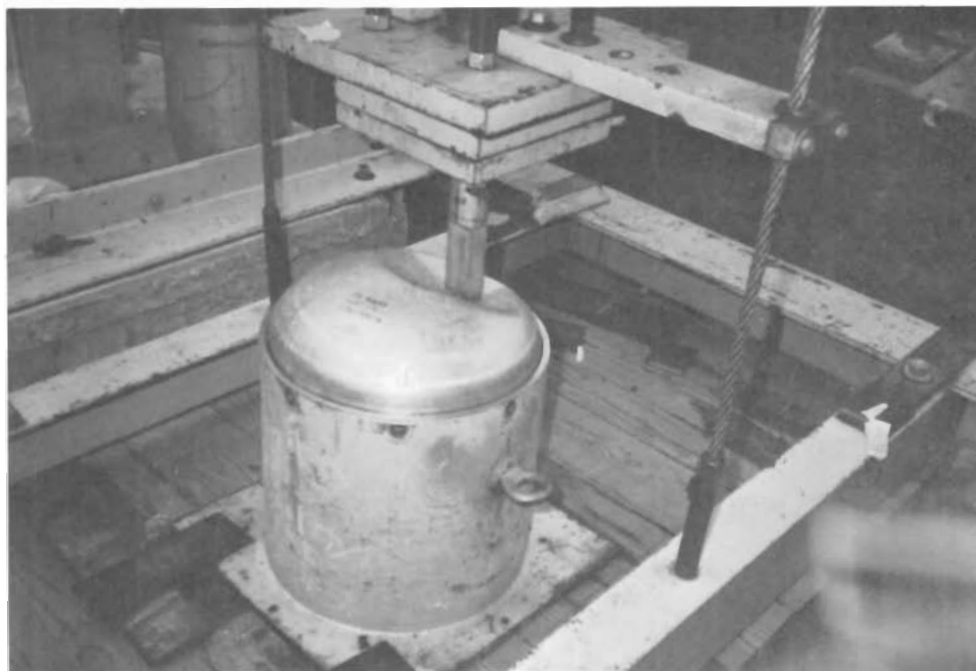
1/10 scale model aluminum tank car barehead in off-center impact test setup with impact direction parallel to the specimen center line.
